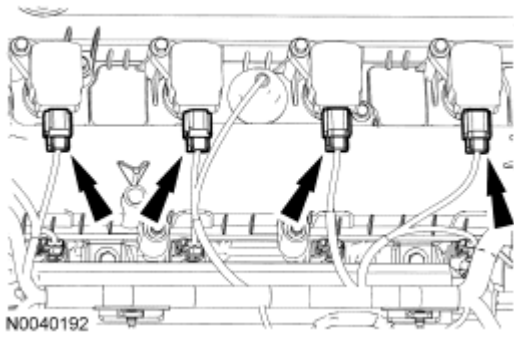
Locating Coil-On-Plug Electrical Connectors
